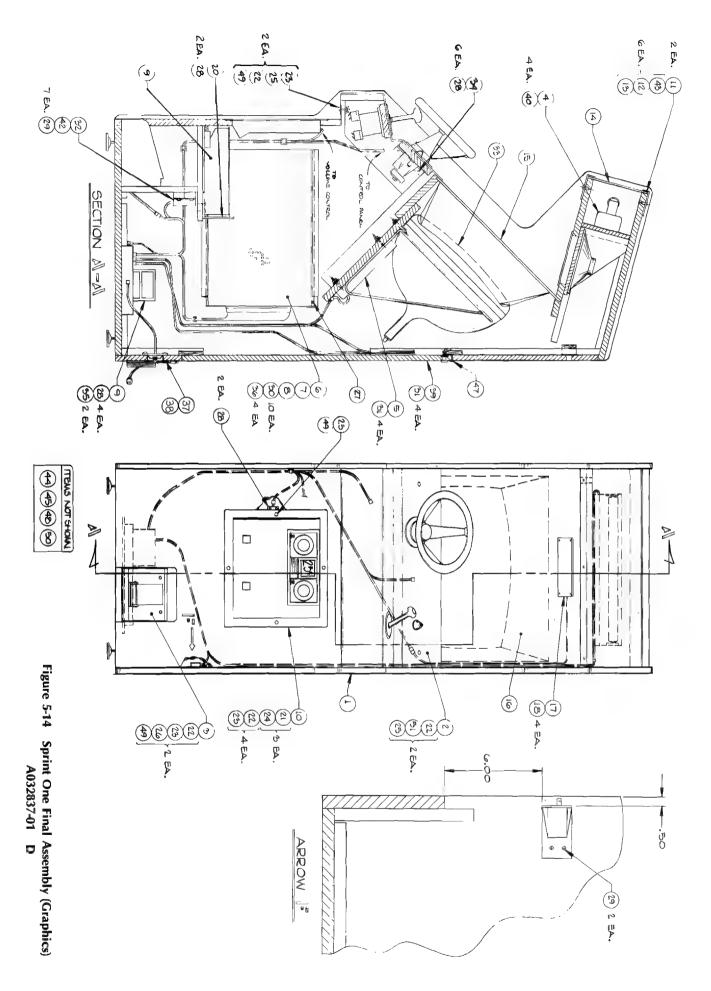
Sprint One Final Assembly (Graphics) Parts List
